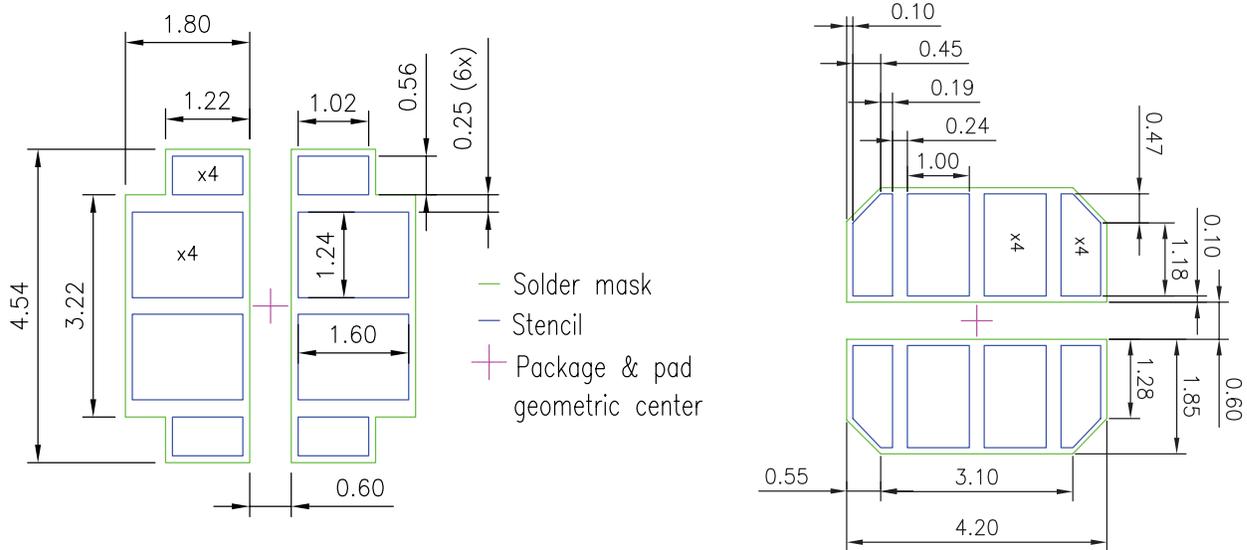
Recommended PCB footprint showing solder mask and stencil opening for LUXEON 5050 (Round LES), left, and LUXEON 5050 (Square LES), right. Dimensions are in mm.
